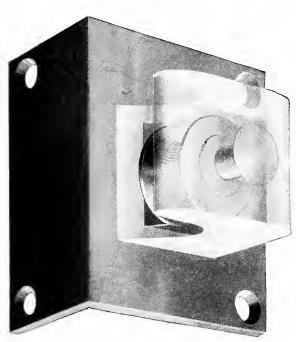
Roller Bearing Vestibule Curtain Hook.
